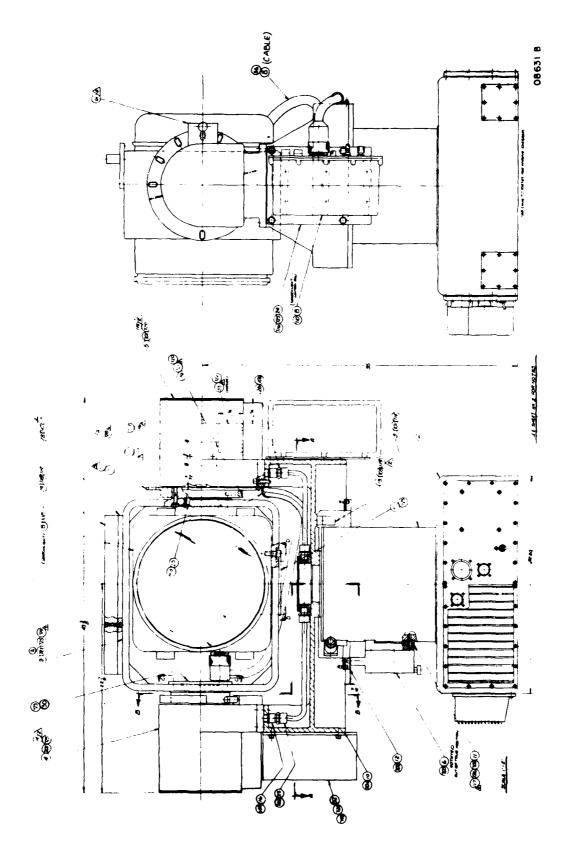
Searchlight Positioner Parts Location (sheet 1 of 2)
